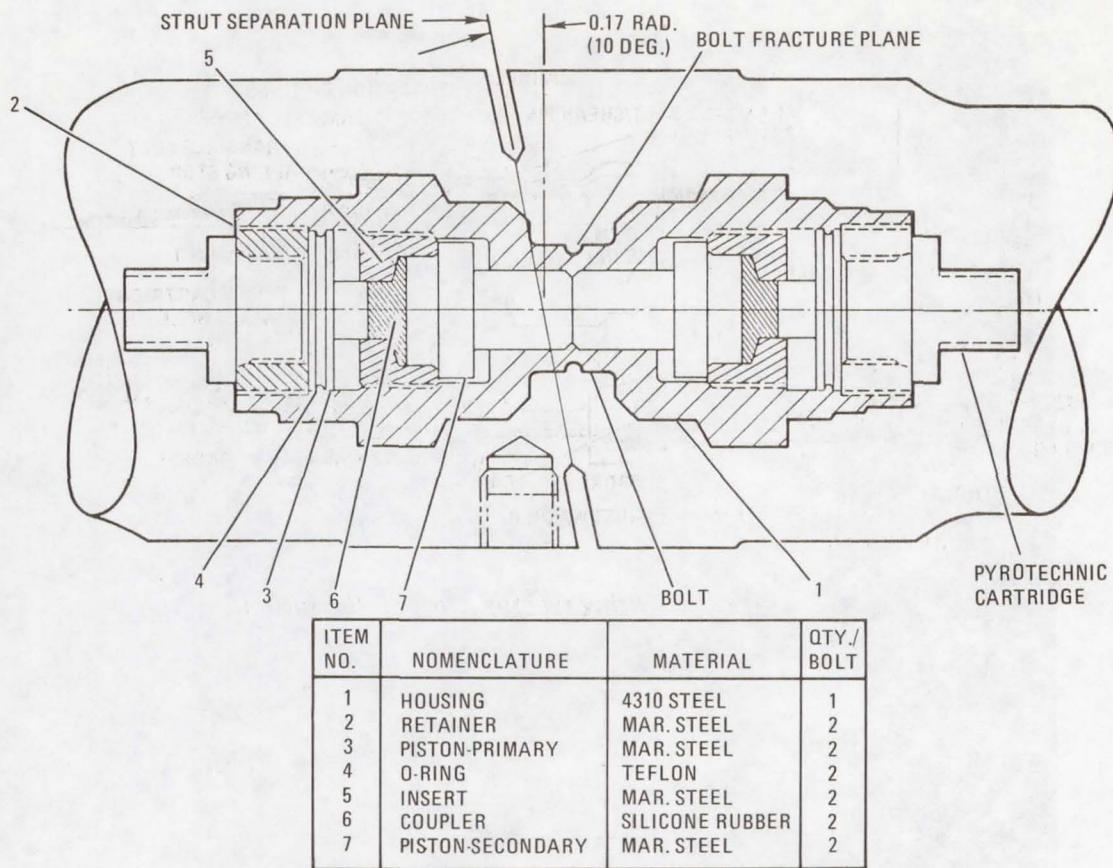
Forward bearing reactor separation bolt assembly configuration.
